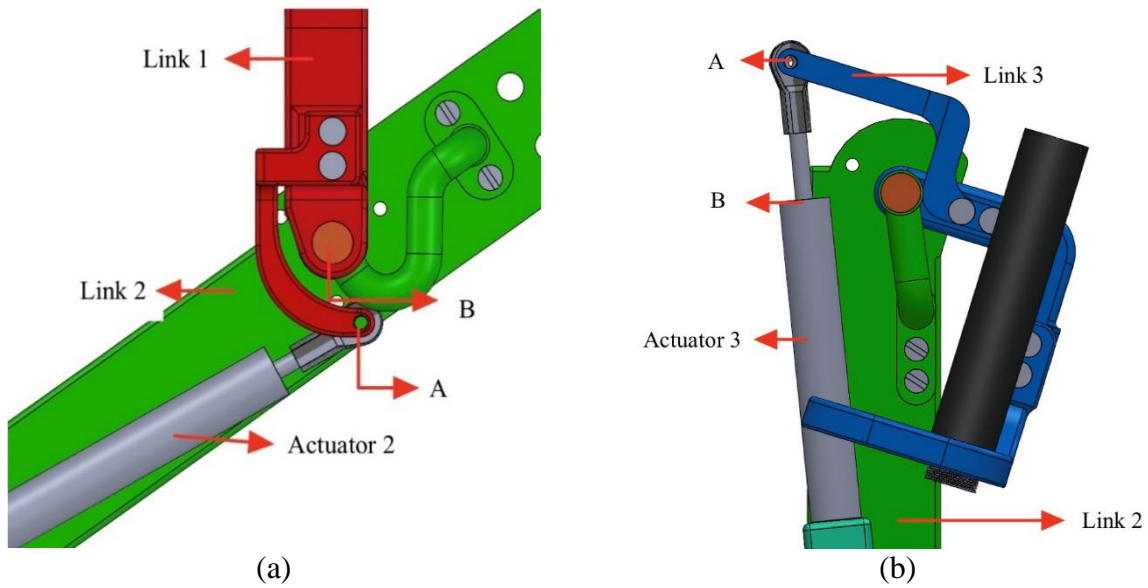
Assembly of, (a) joint 2, (b) joint 3.
